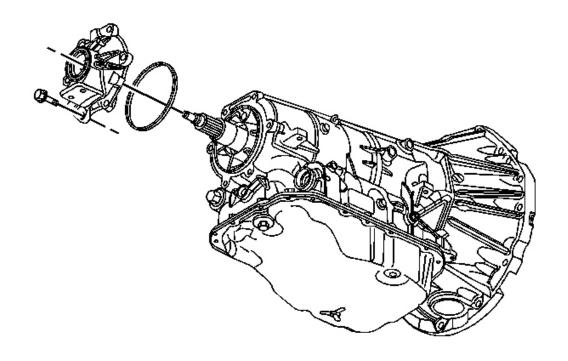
View Of J 45012 Courtesy of GENERAL MOTORS CORP.
